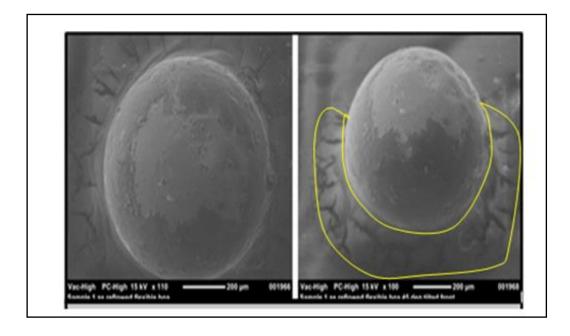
SEM surface fracture examination of BGA solder balls joints
